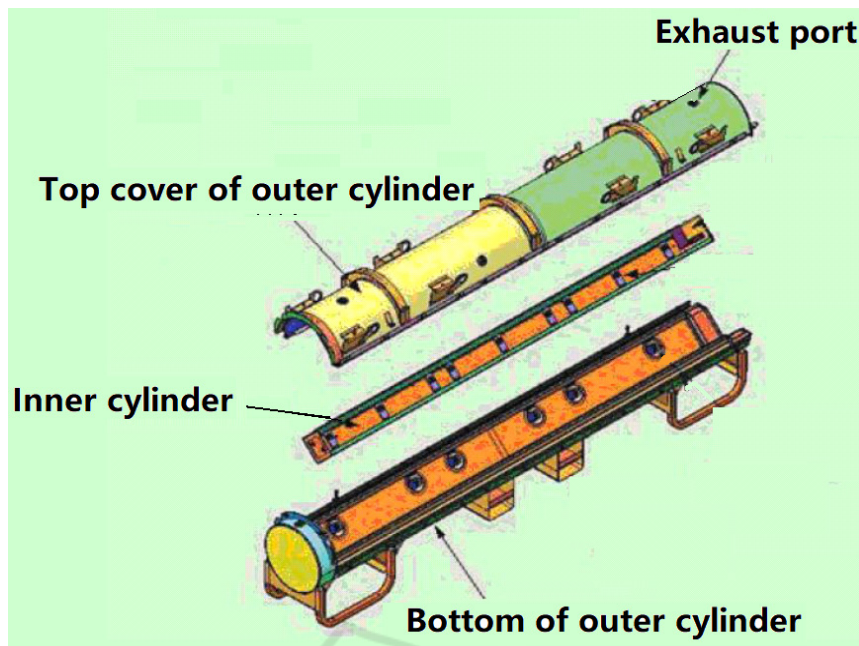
Fuel Assembly Shipping Container Component Drawing.
